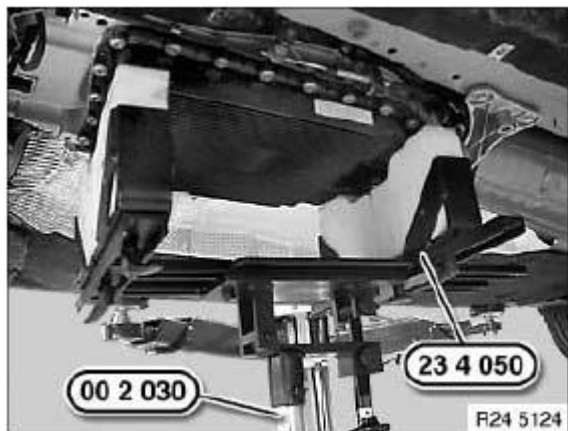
Identifying Special Tool (00 2 030) And (23 4 050)
